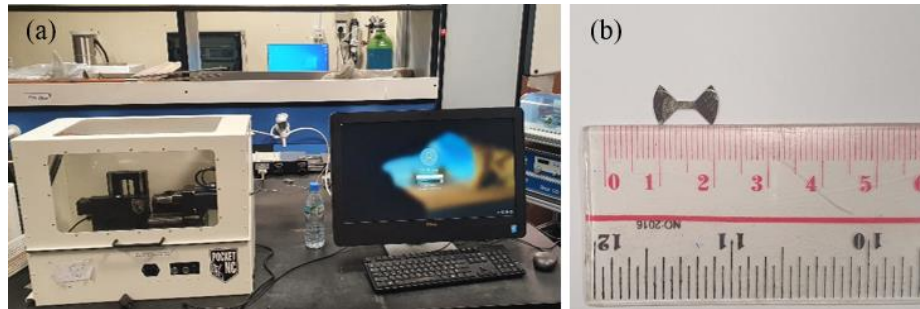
(a) Pocket NC CNC machine, (b) tensile sample after cut.
